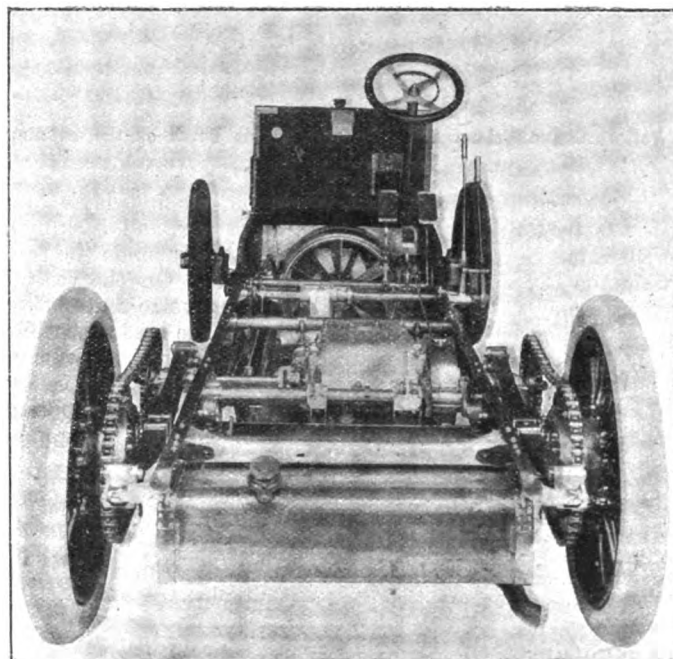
Rear View of De Dietrich 60-h.p. Chassis.
